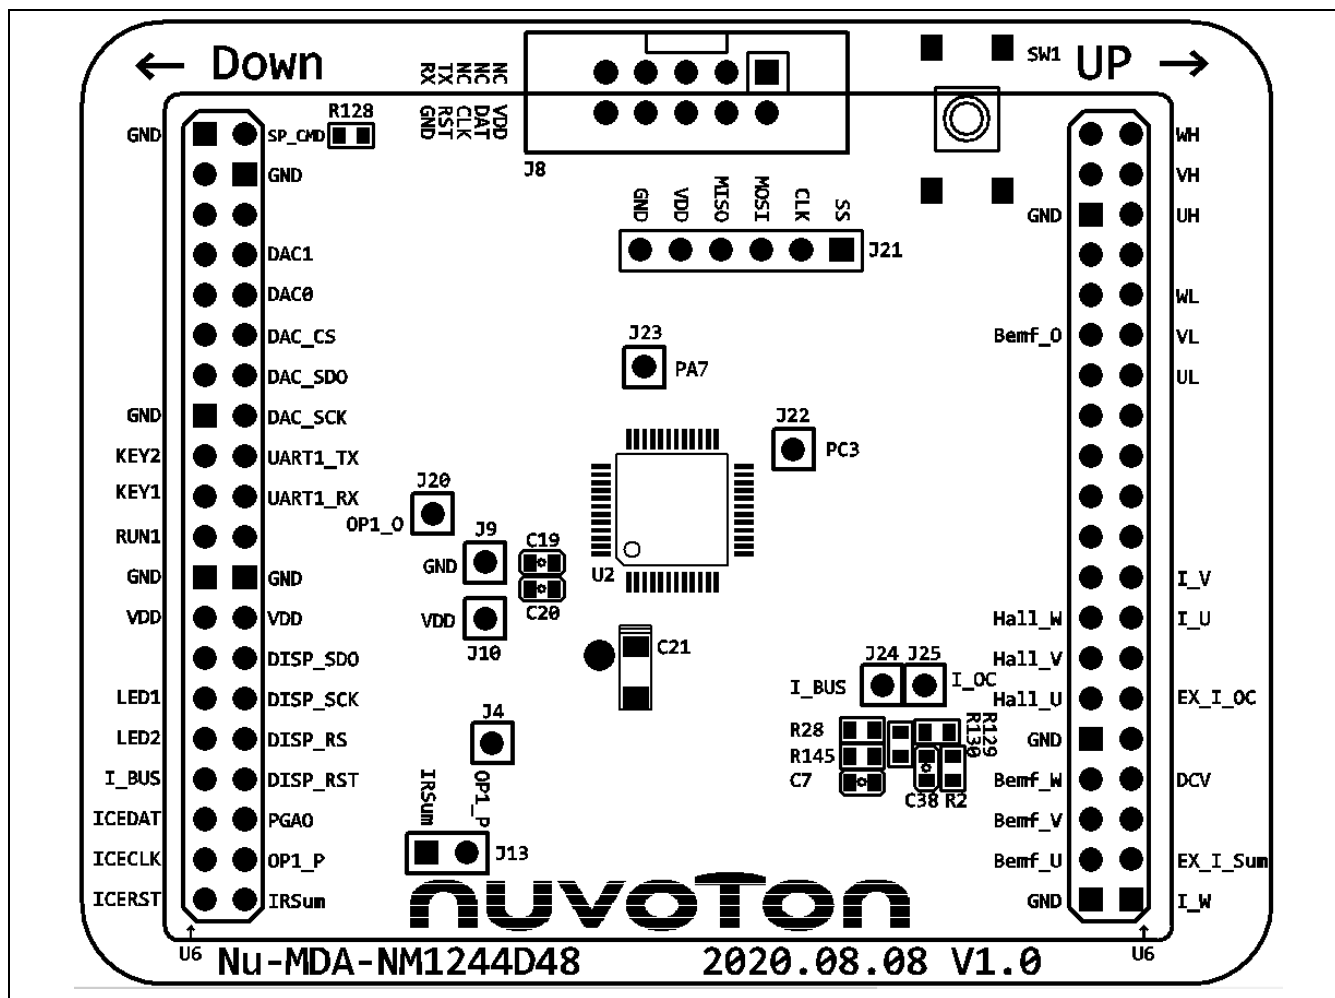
Nu-MDA-NM1240 PCB Placement
